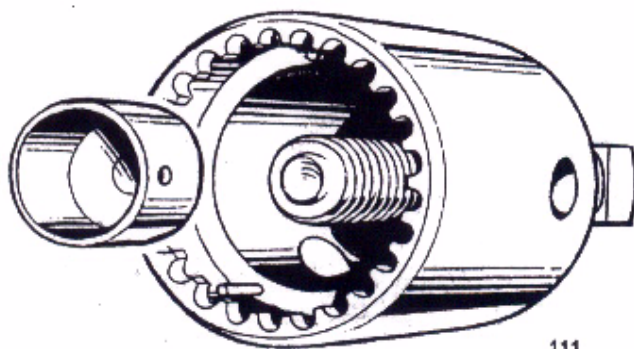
Extractor tool Z121 showing protection cap which fits over crankshaft
